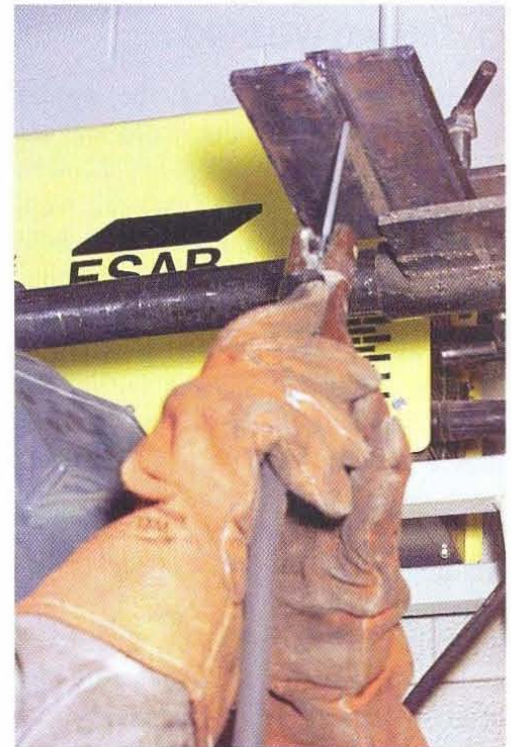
A welder may use both hands to hold the electrode when welding in overhead position.
